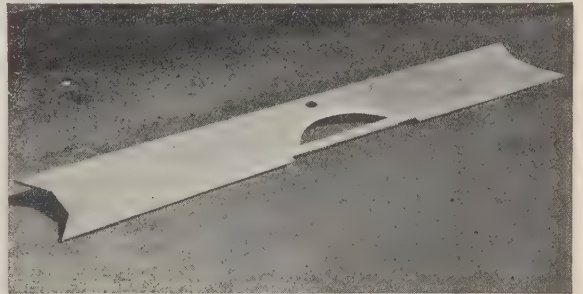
PLATE COMPONENT SHAPED BY SHEARING AND FLAME-CUTTING
